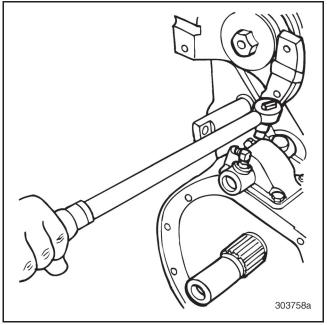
Installing Differential Lockout Air Shifter Housing Capscrews
